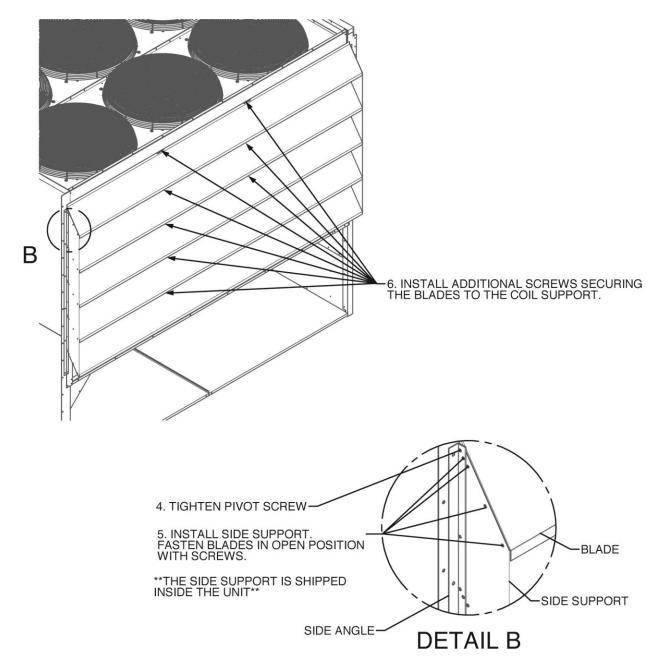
90-140 ton Condenser Coil Guard Installation Instructions 2
